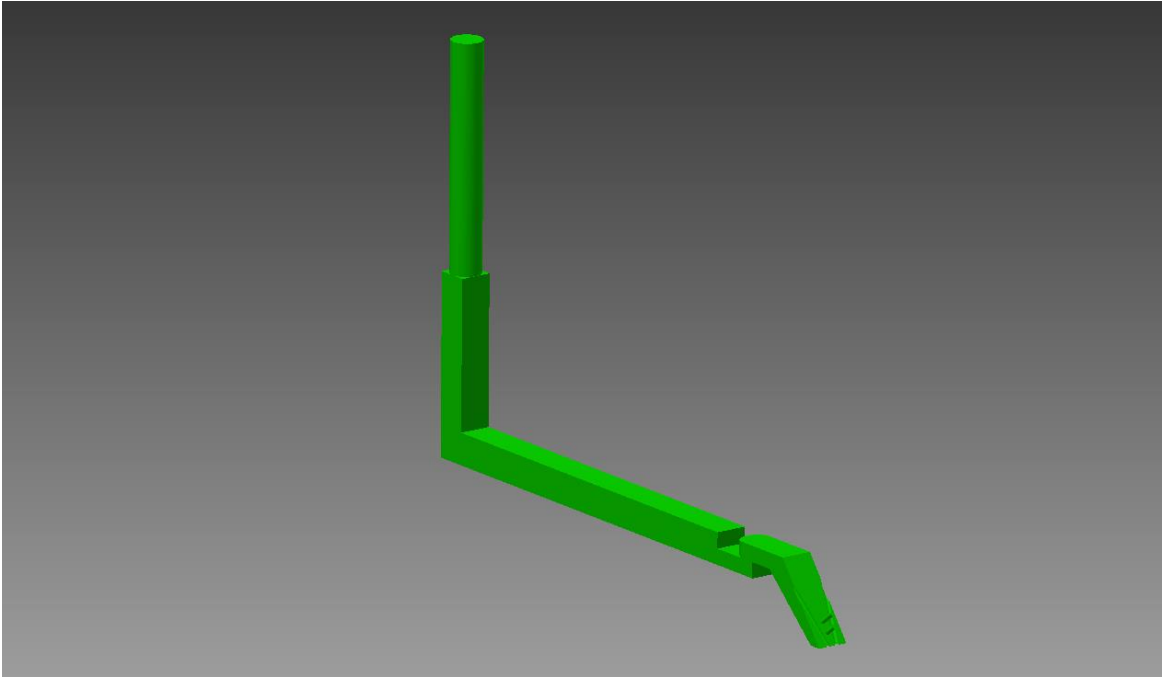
CAD drawing of custom-built, 3D printed dual probe holder.
